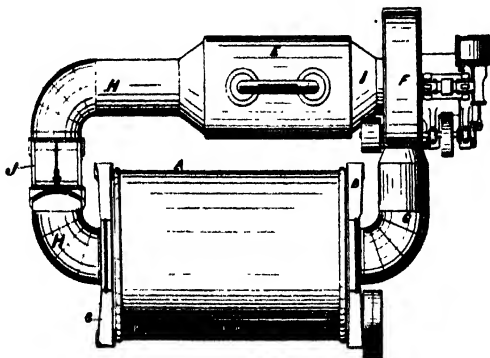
Moist Warm Air Withering Machine or Apparatus, with Rotary Leaf Container (plan).
